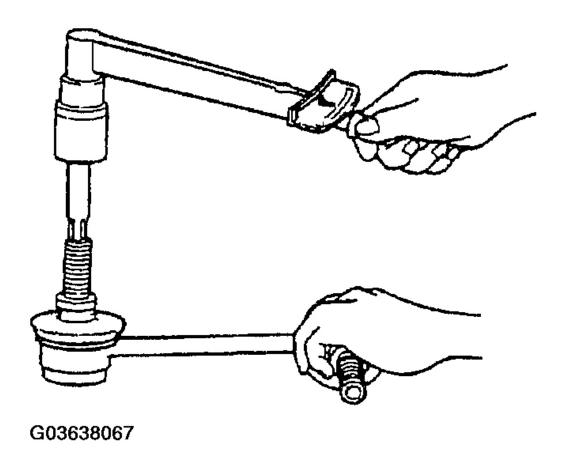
Measuring Ball Joint Starting Torque Courtesy of MAZDA MOTORS CORP.
